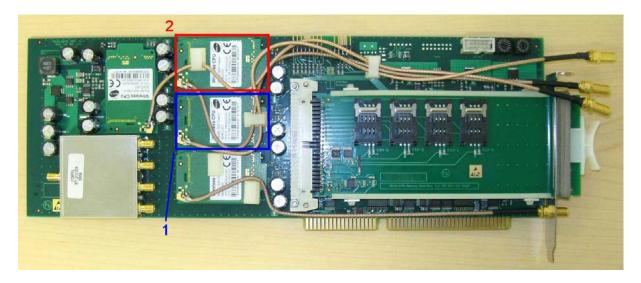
GSM Card, PCB (top view, with SIM card holder, active modules are marked)
